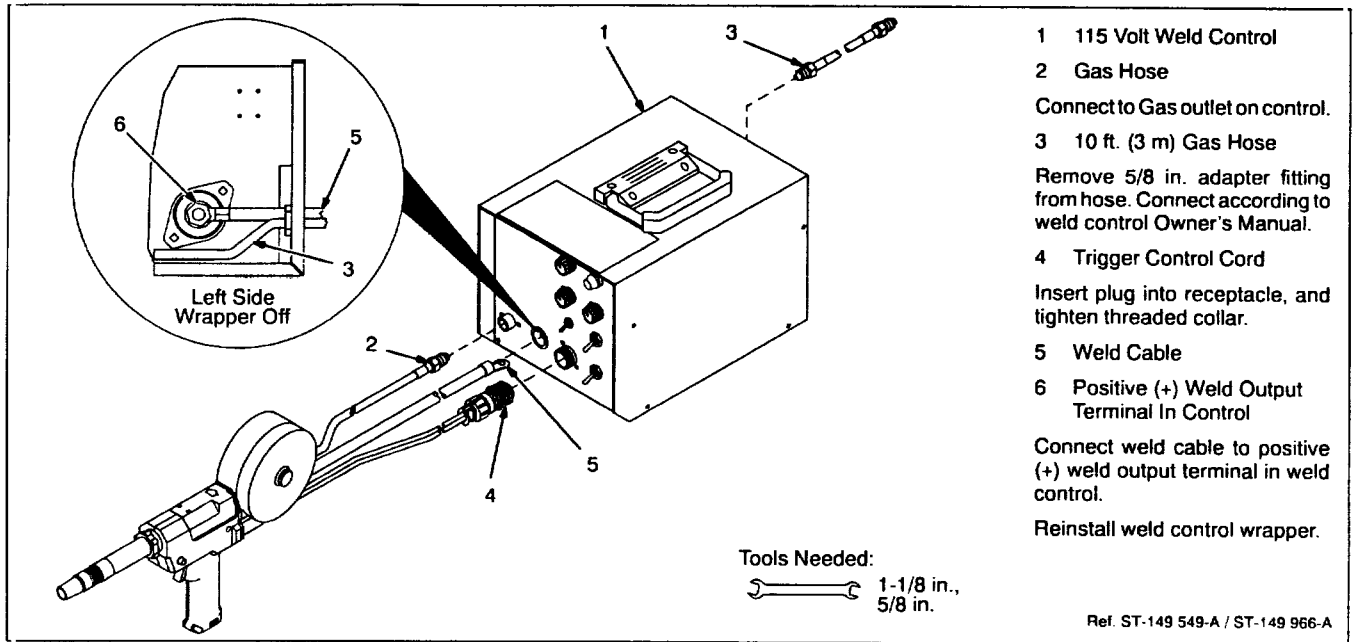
Connections To 115 Volt Weld Control
